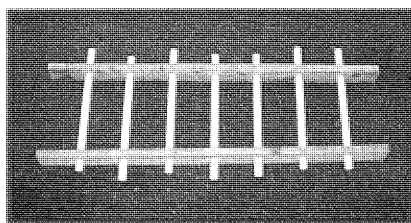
Slide the cut PVC pieces through the drilled holes in the inside 1 x 3 pieces.
